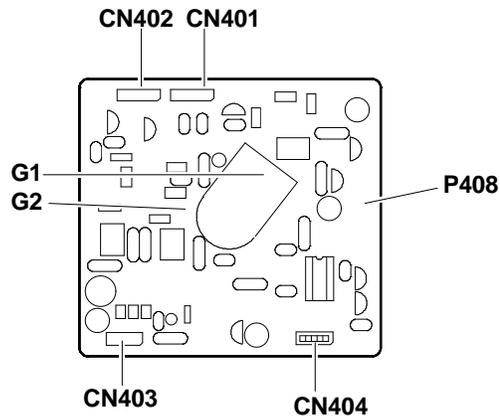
Locating the Connectors on the Video Amplifier Board
